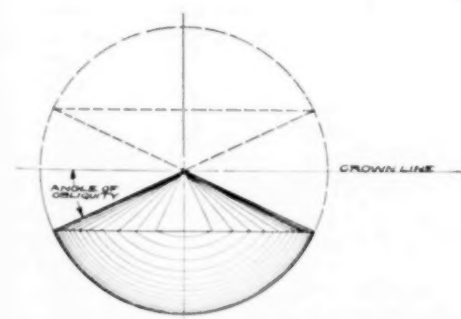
BASE SURFACE OF THE INVOLUTE CROWN GEAR
